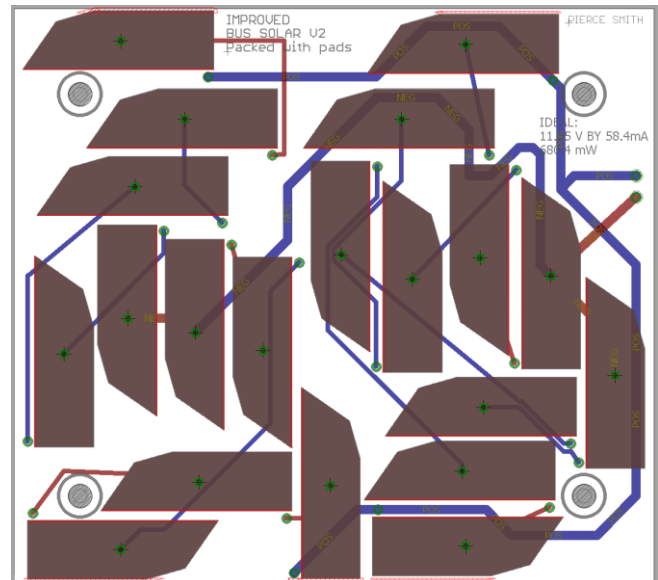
An improved version of CACTUS-I's Bus PCB Solar Panel V2. This version also has had its pads fixed so that assembly will be easier. While it is very tight, an additional string has been added to the board, this increases yield by 33%. The traces that are carrying the most current from the parallel branches have been thickened to keep them healthy.
